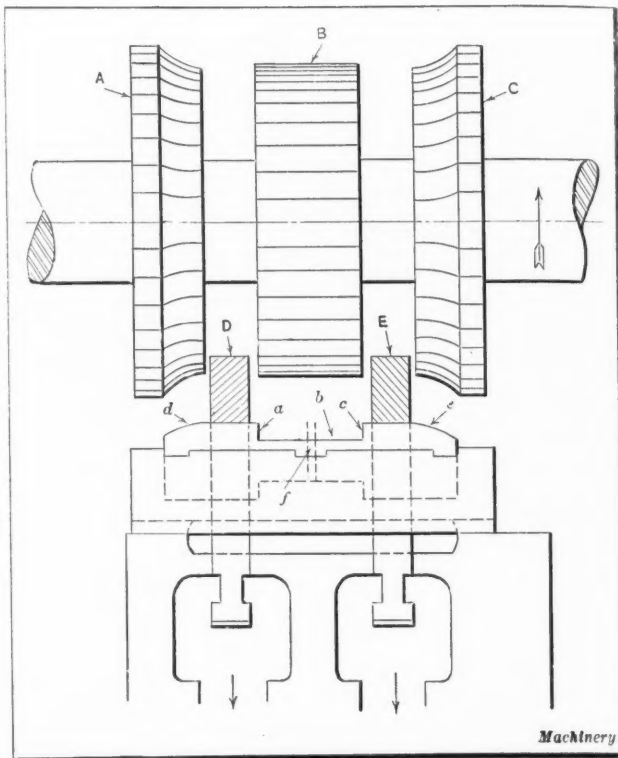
Milling Fixture provided with Interchangeable Work-holding Base
